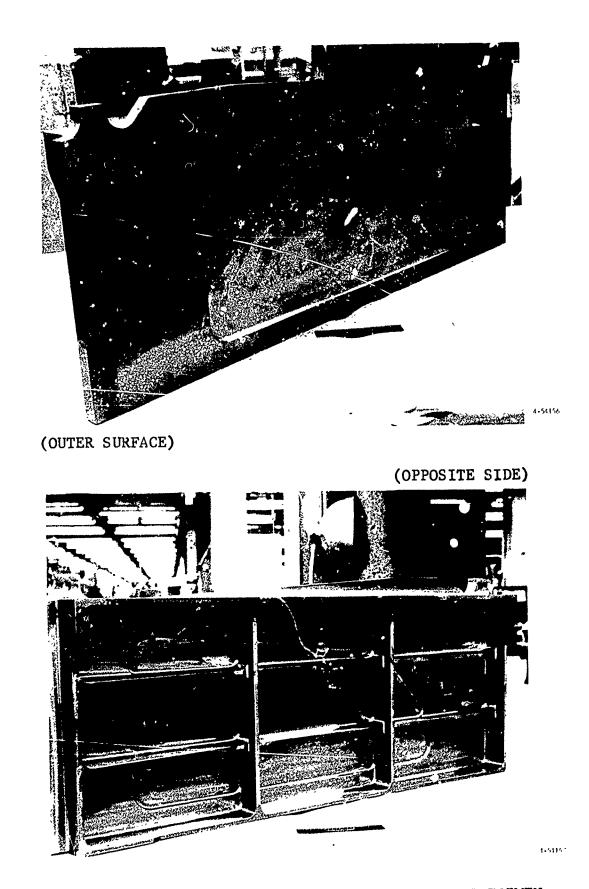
ASSEMBLED 603FTB053 (TOP SIDE AND BOTTOM SIDE)
